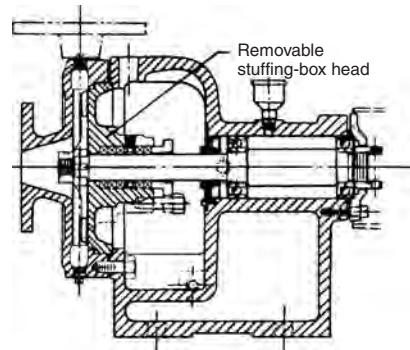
End-suction frame-mounted pump with a semi-open impeller and a removable stuffing-box head.
